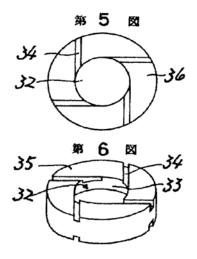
is a rear view and Figure 6 is a perspective view of piece 3. *Id.* at 6. Kitabayashi describes that when a piece like piece 3 is fixed within an injection passage, cut grooves 34 form a swirling flow inside recess 32, and under pressure, turbulence forms and breaks up the liquid into particles to form a spray. *Id.* at 4. Kitabayashi describes that in its spray nozzle, piece 3 is "loosely inserted" into cylindrical chamber 12 and piece 3 rotates as liquid passes through it. *Id.* at 4–5. This rotation allows for a faster swirling flow of pressurized liquid, which allows for discharge of a fine mist from the spray nozzle at lower pressures using no propellant at all. *Id.* at 5.
